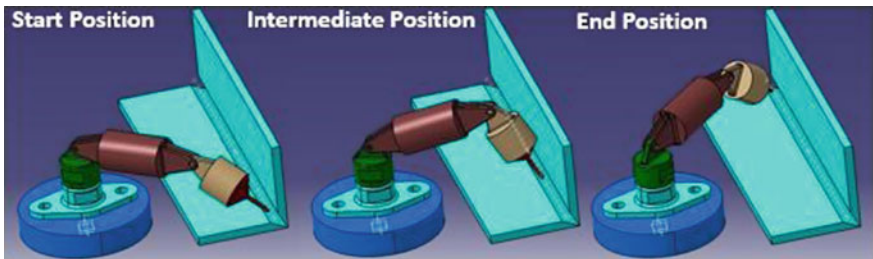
Robot following seam path for performing welding operation of L-joint
